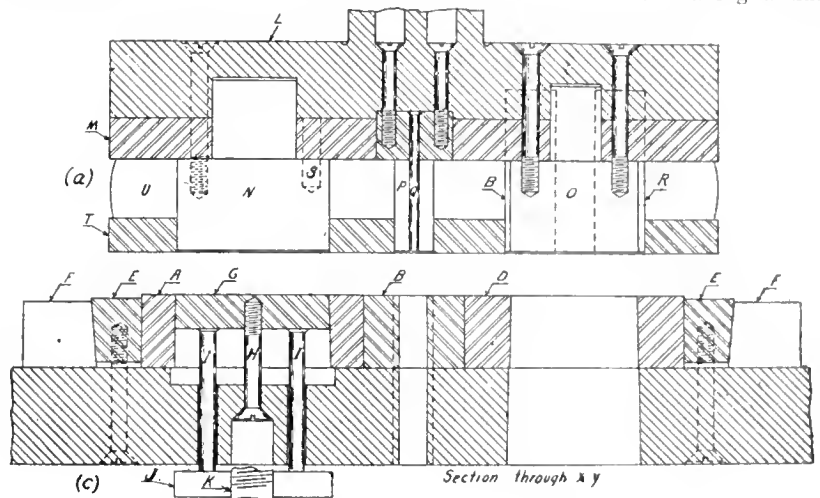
PROGRESSIVE DIE FOR PUNCHING OUT FLAT SHAPE
